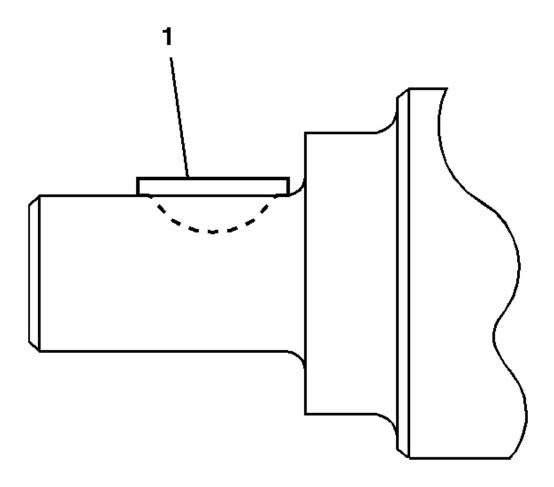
View Of Crankshaft Sprocket Key Installation Position Courtesy of GENERAL MOTORS CORP.
